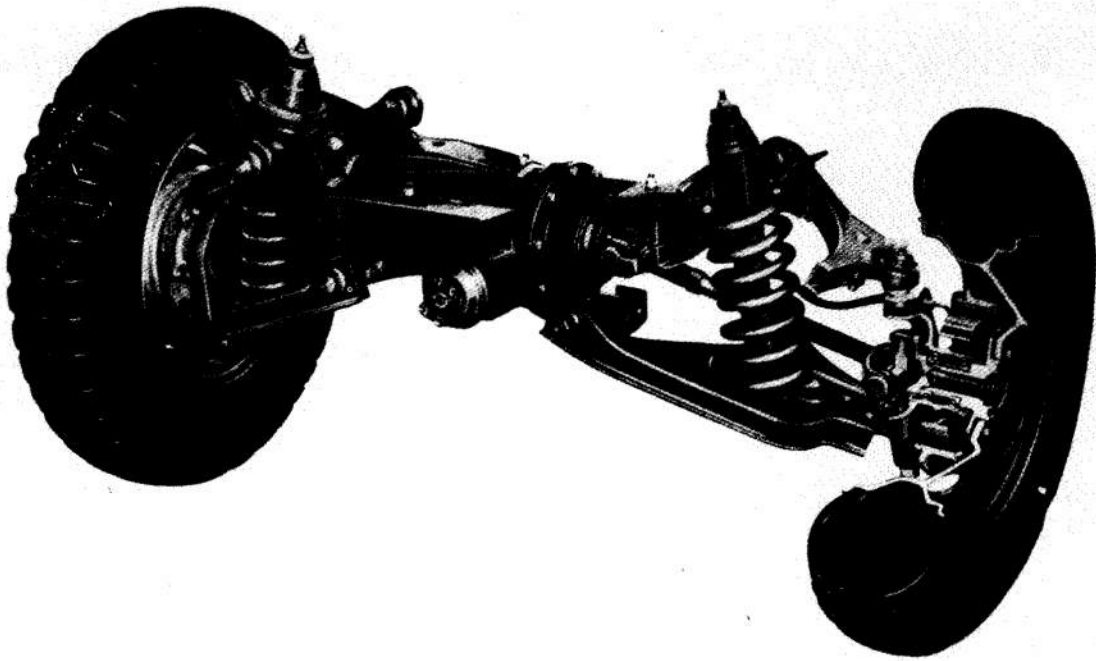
Driven Parallel Wishbone Coil Spring Front Suspension
